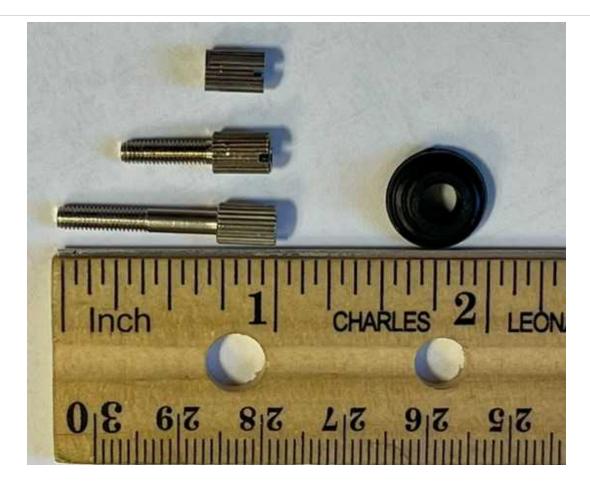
Part sizing for solenoid valve connection (Nut-top left; short screw-middle left; long screw-bottom left; o-ring-bottom right) Nut, screws, and o-ring are included with solenoid valve.
